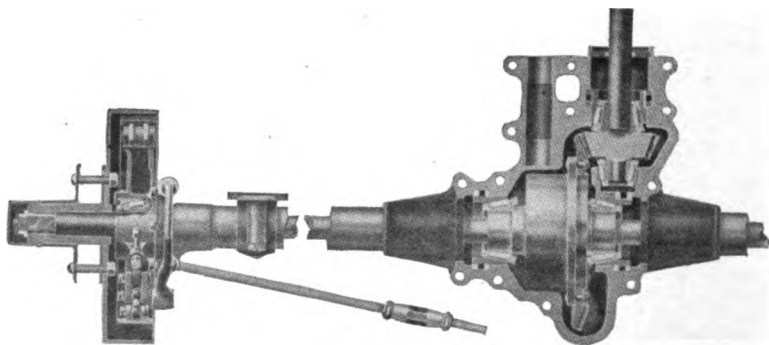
Rear Vertical and Horizontal Views of Shaft-Driven Rear Axle.
